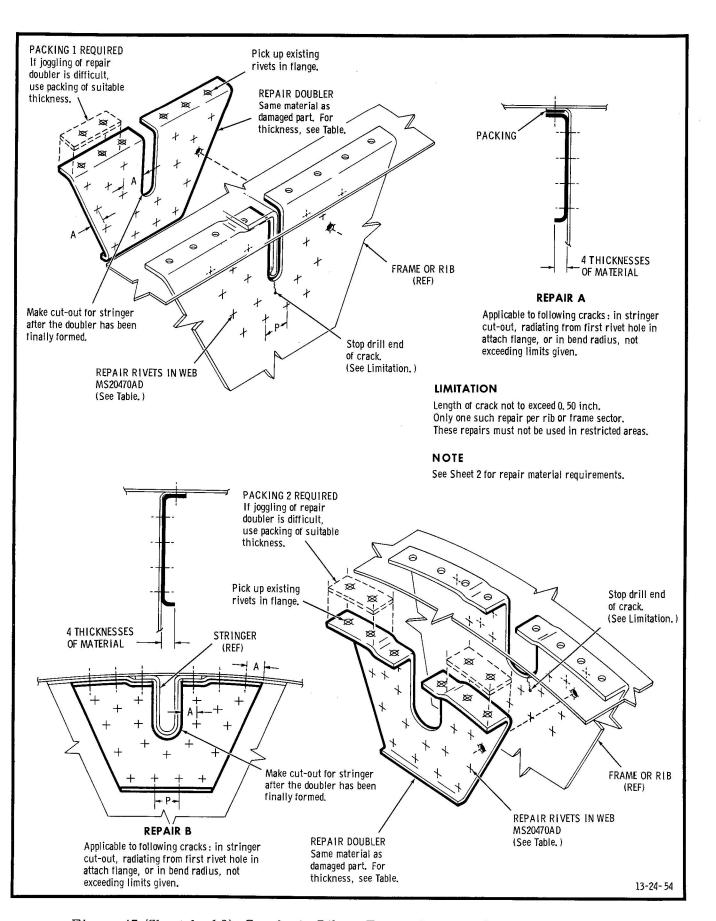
(Sheet 1 of 2) Cracks in Rib or Frame Stringer Cut-outs - Repair
